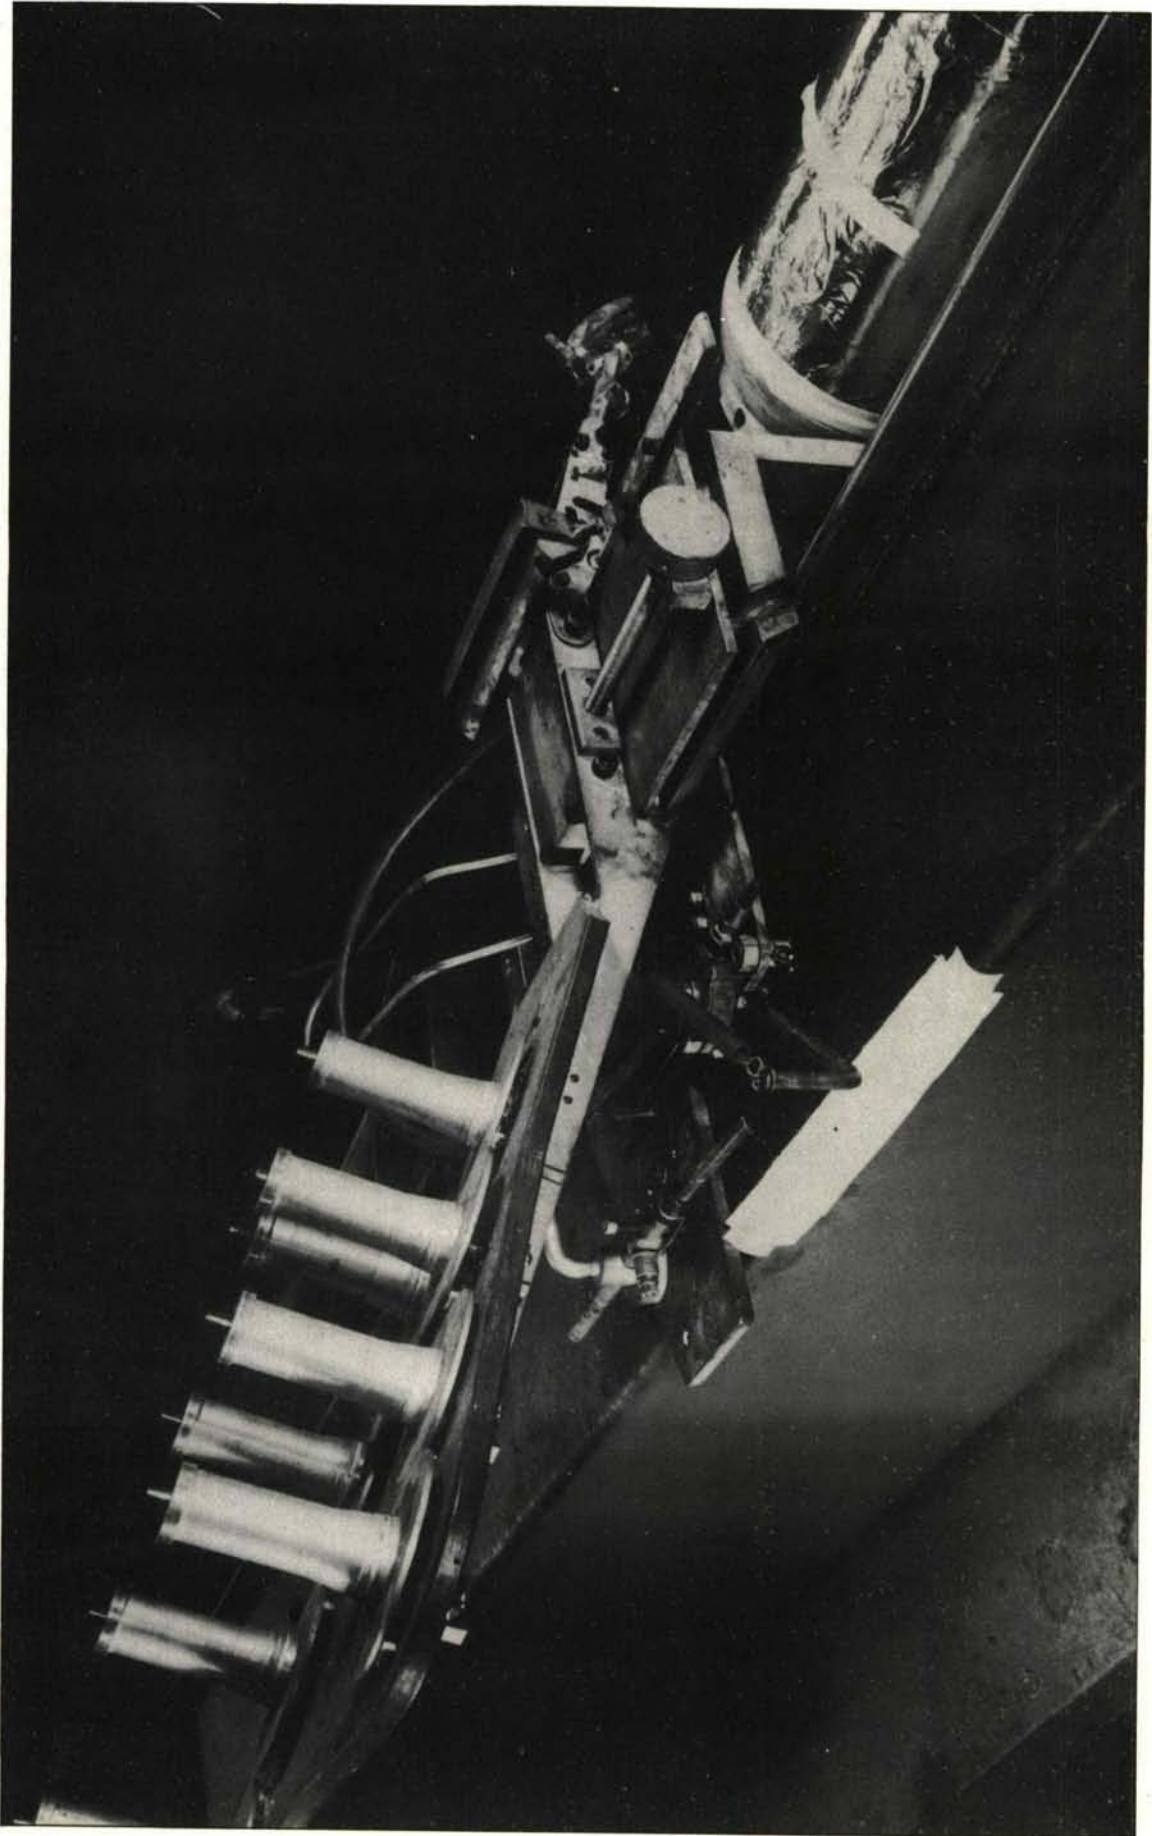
GENERAL ARRANGEMENT OF KELLOGG TUBE WINDING MACHINE
